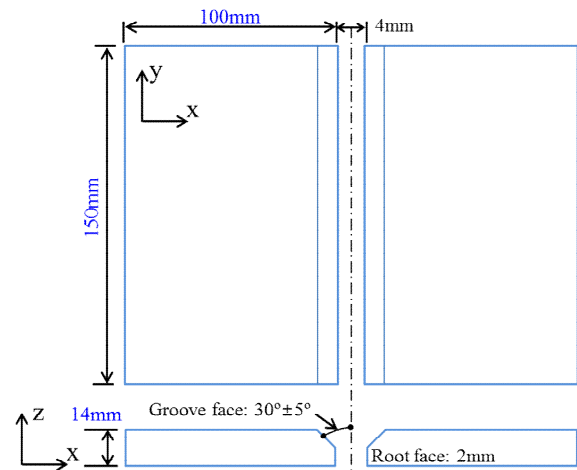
Configuration of weld joint and dimensions of plates for welding.
